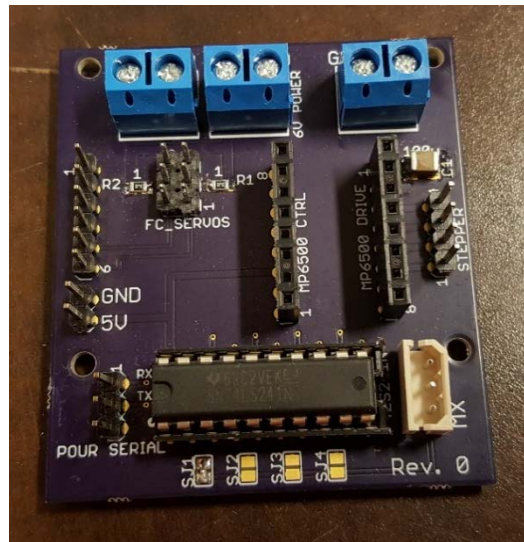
CUSTOM AUXILIARY BOARD.
